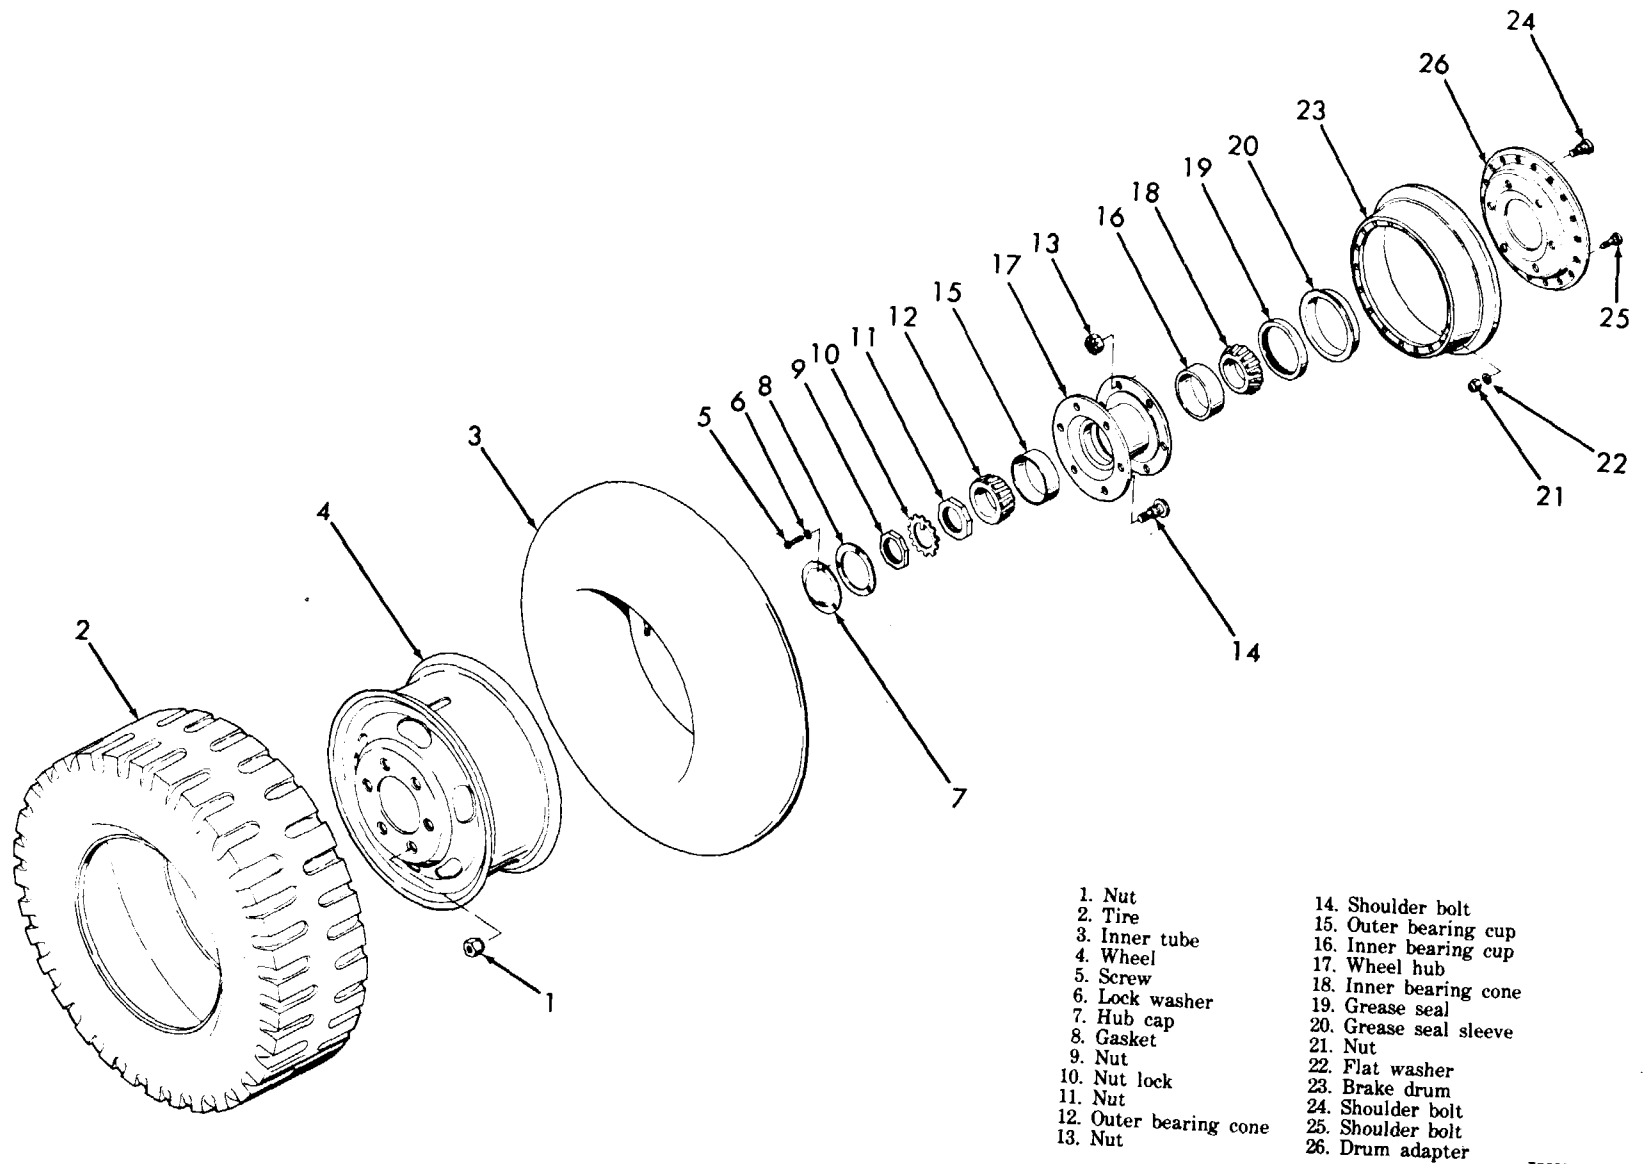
Wheel, tire, hub, and drum, exploded view.
